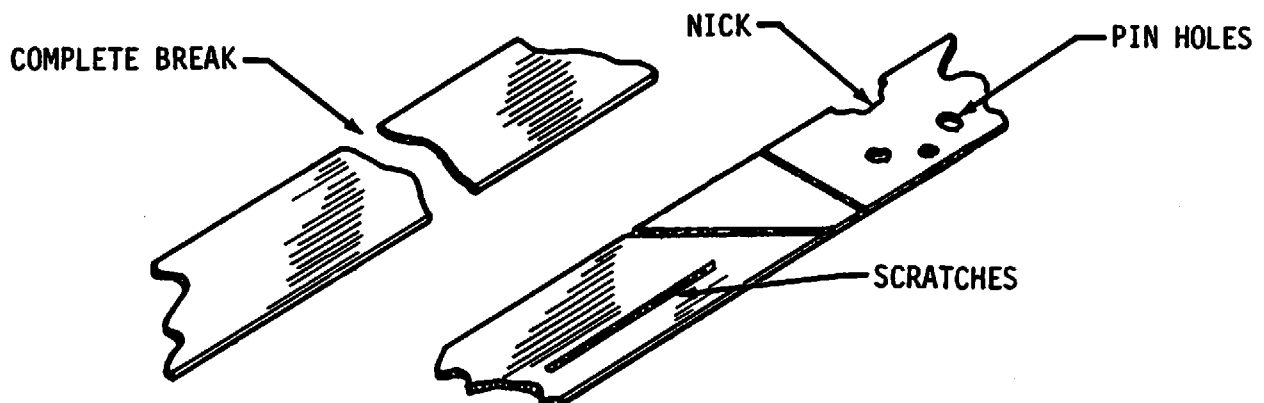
TYPICAL PRINTED WIRING DAMAGE
